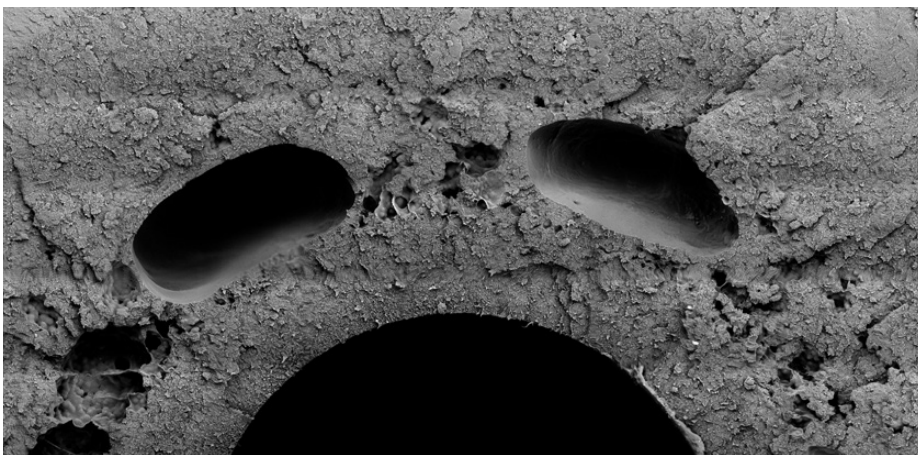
Cavities in the fracture surface of a cylindrical hollow part.
